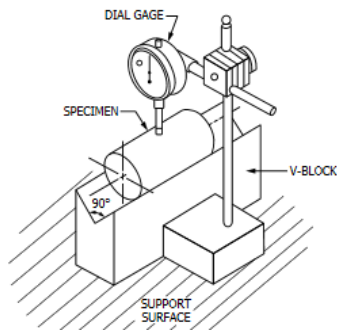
Experimental set up to check cylindrical surface (ASTM, 2008)
